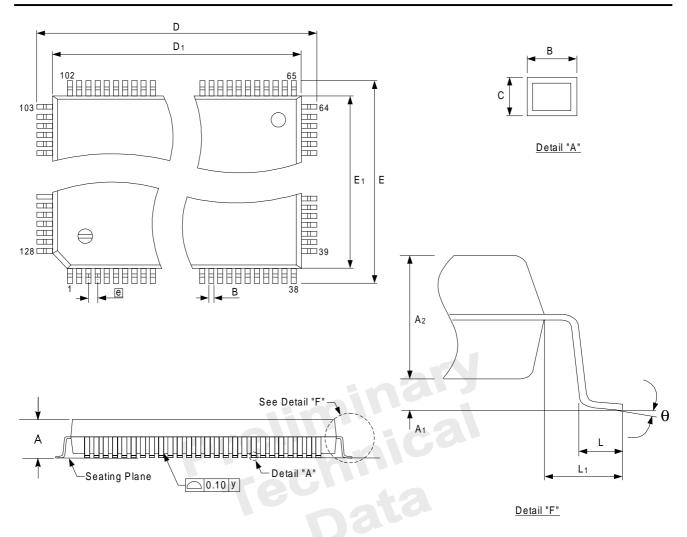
AIT2139 128-Lead Metric Quad Flat Pack (MQFP) Dimensions
